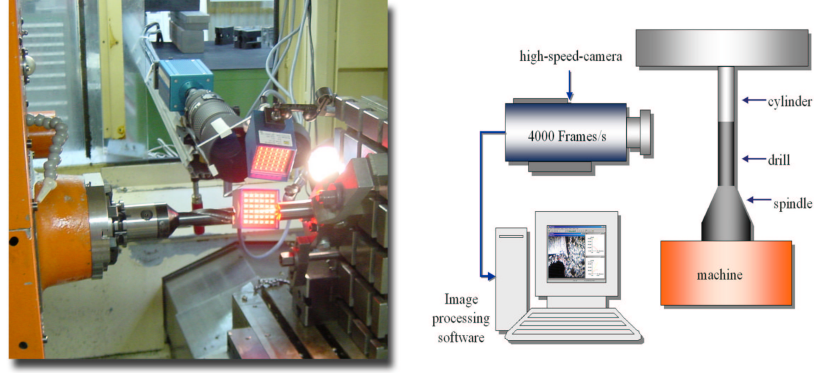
The used machine (left) and a schematic view of the setup (right).
